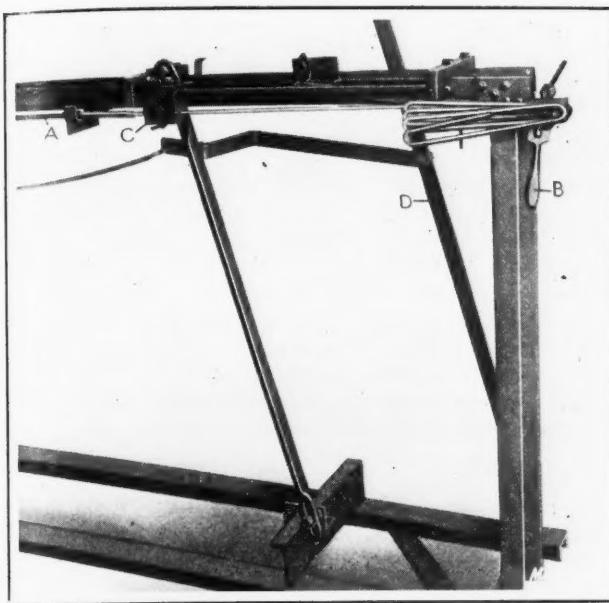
Equipment by Means of which Tubes 25 Feet Long are formed into Refrigerator Coils
